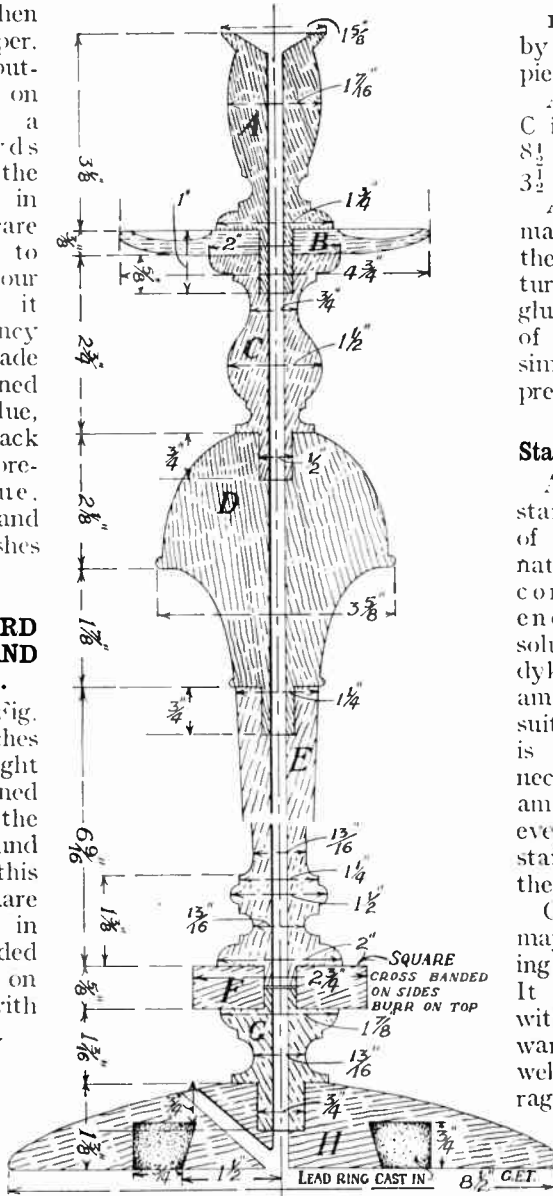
DIMENSIONS OF WOOD FOR STANDARD SHOWN IN FIG. 14.
